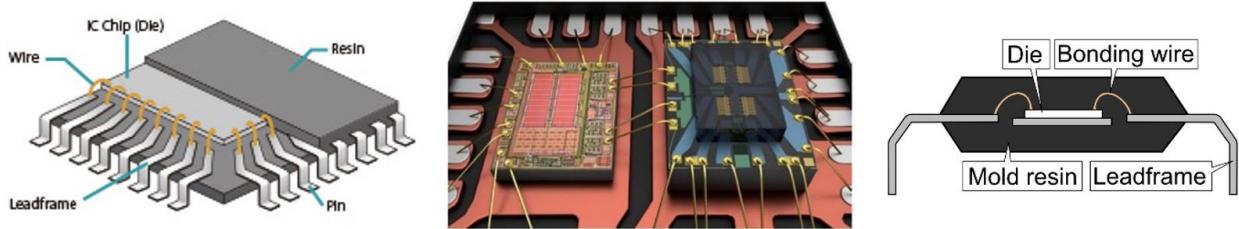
Left: structure of a lead-frame package (source: Toppan Printing Co.). Centre: picture of wire bonded chips (source: allaboutcircuits.com). Right: wire bonding technique for chips packaging (source: Wiki).
